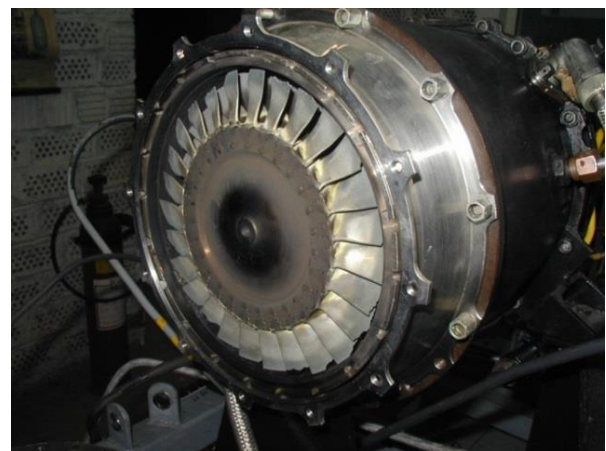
Destroyed gas turbine rotor blades of MPM-20 because of unstable work of a radial compressor
